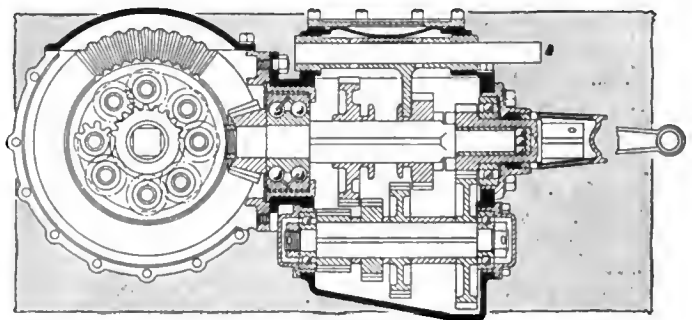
Lefever gearset for trucks up to 40 horsepower
